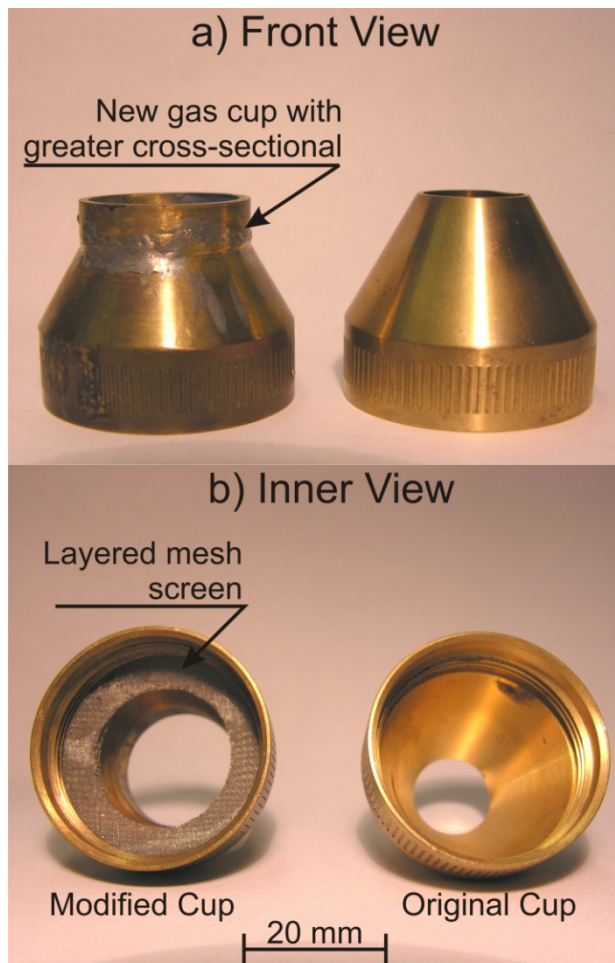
Photograph comparing modified shielding cup (L) original shielding cup (R) for the top Thermal Arc VPPAW torch showing: *a*) front view; *b*) inner view.
